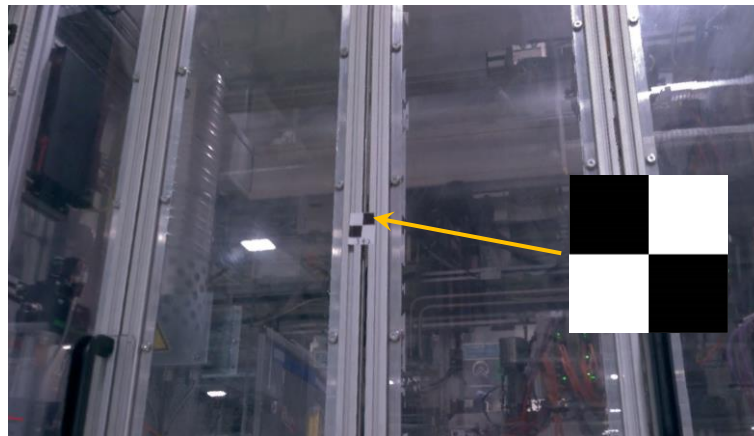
Magnetic tag with reference pattern for hand-held scanner
